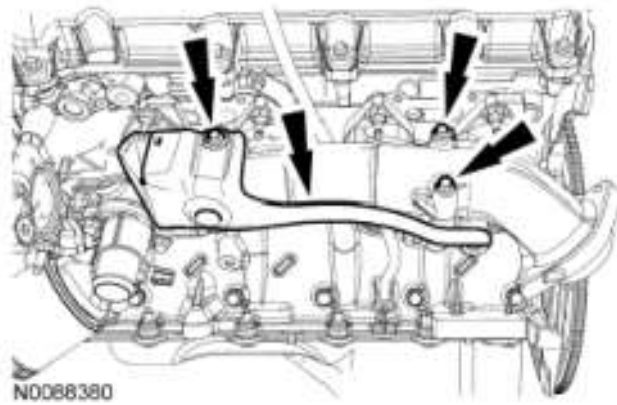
Locating Exhaust Manifold Heat Shield And Bolts
